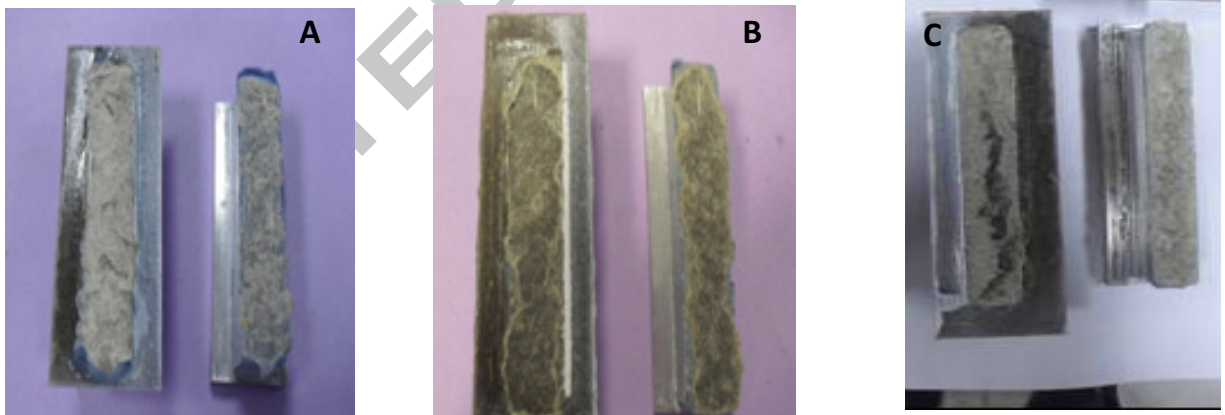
Observation of biocomposite fracture surfaces, indicating failure within the flax mat. A : Loading at 0°. B : 90°. C : 45°
